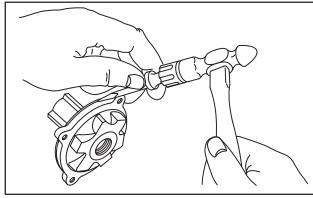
DISASSEMBLING SEALED CLUTCH
